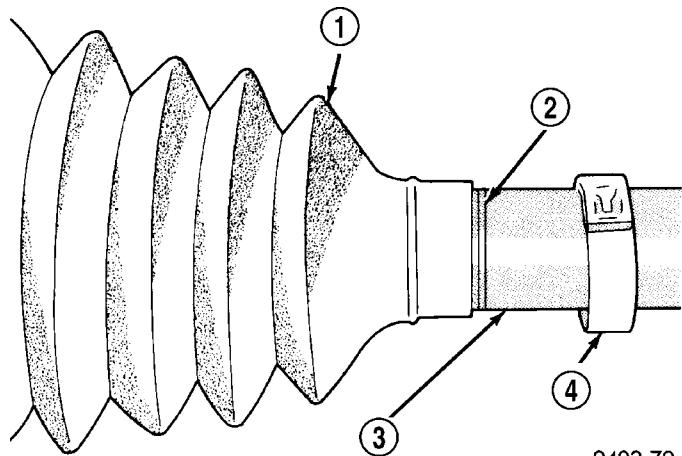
Seal Boot Correctly Positioned On Interconnecting Shaft
